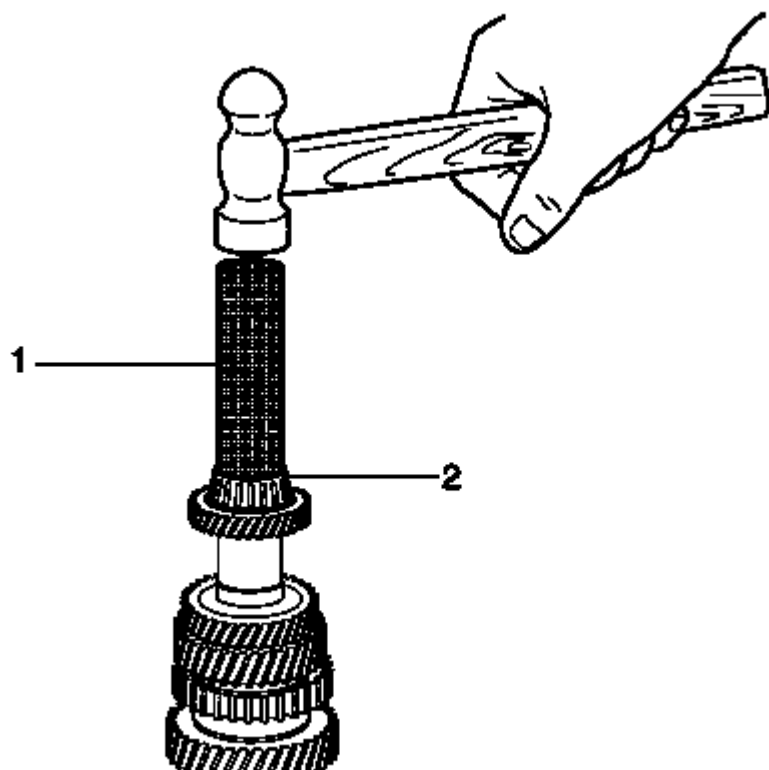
Installing Left Side Bearing Using DT-49080 Tool
